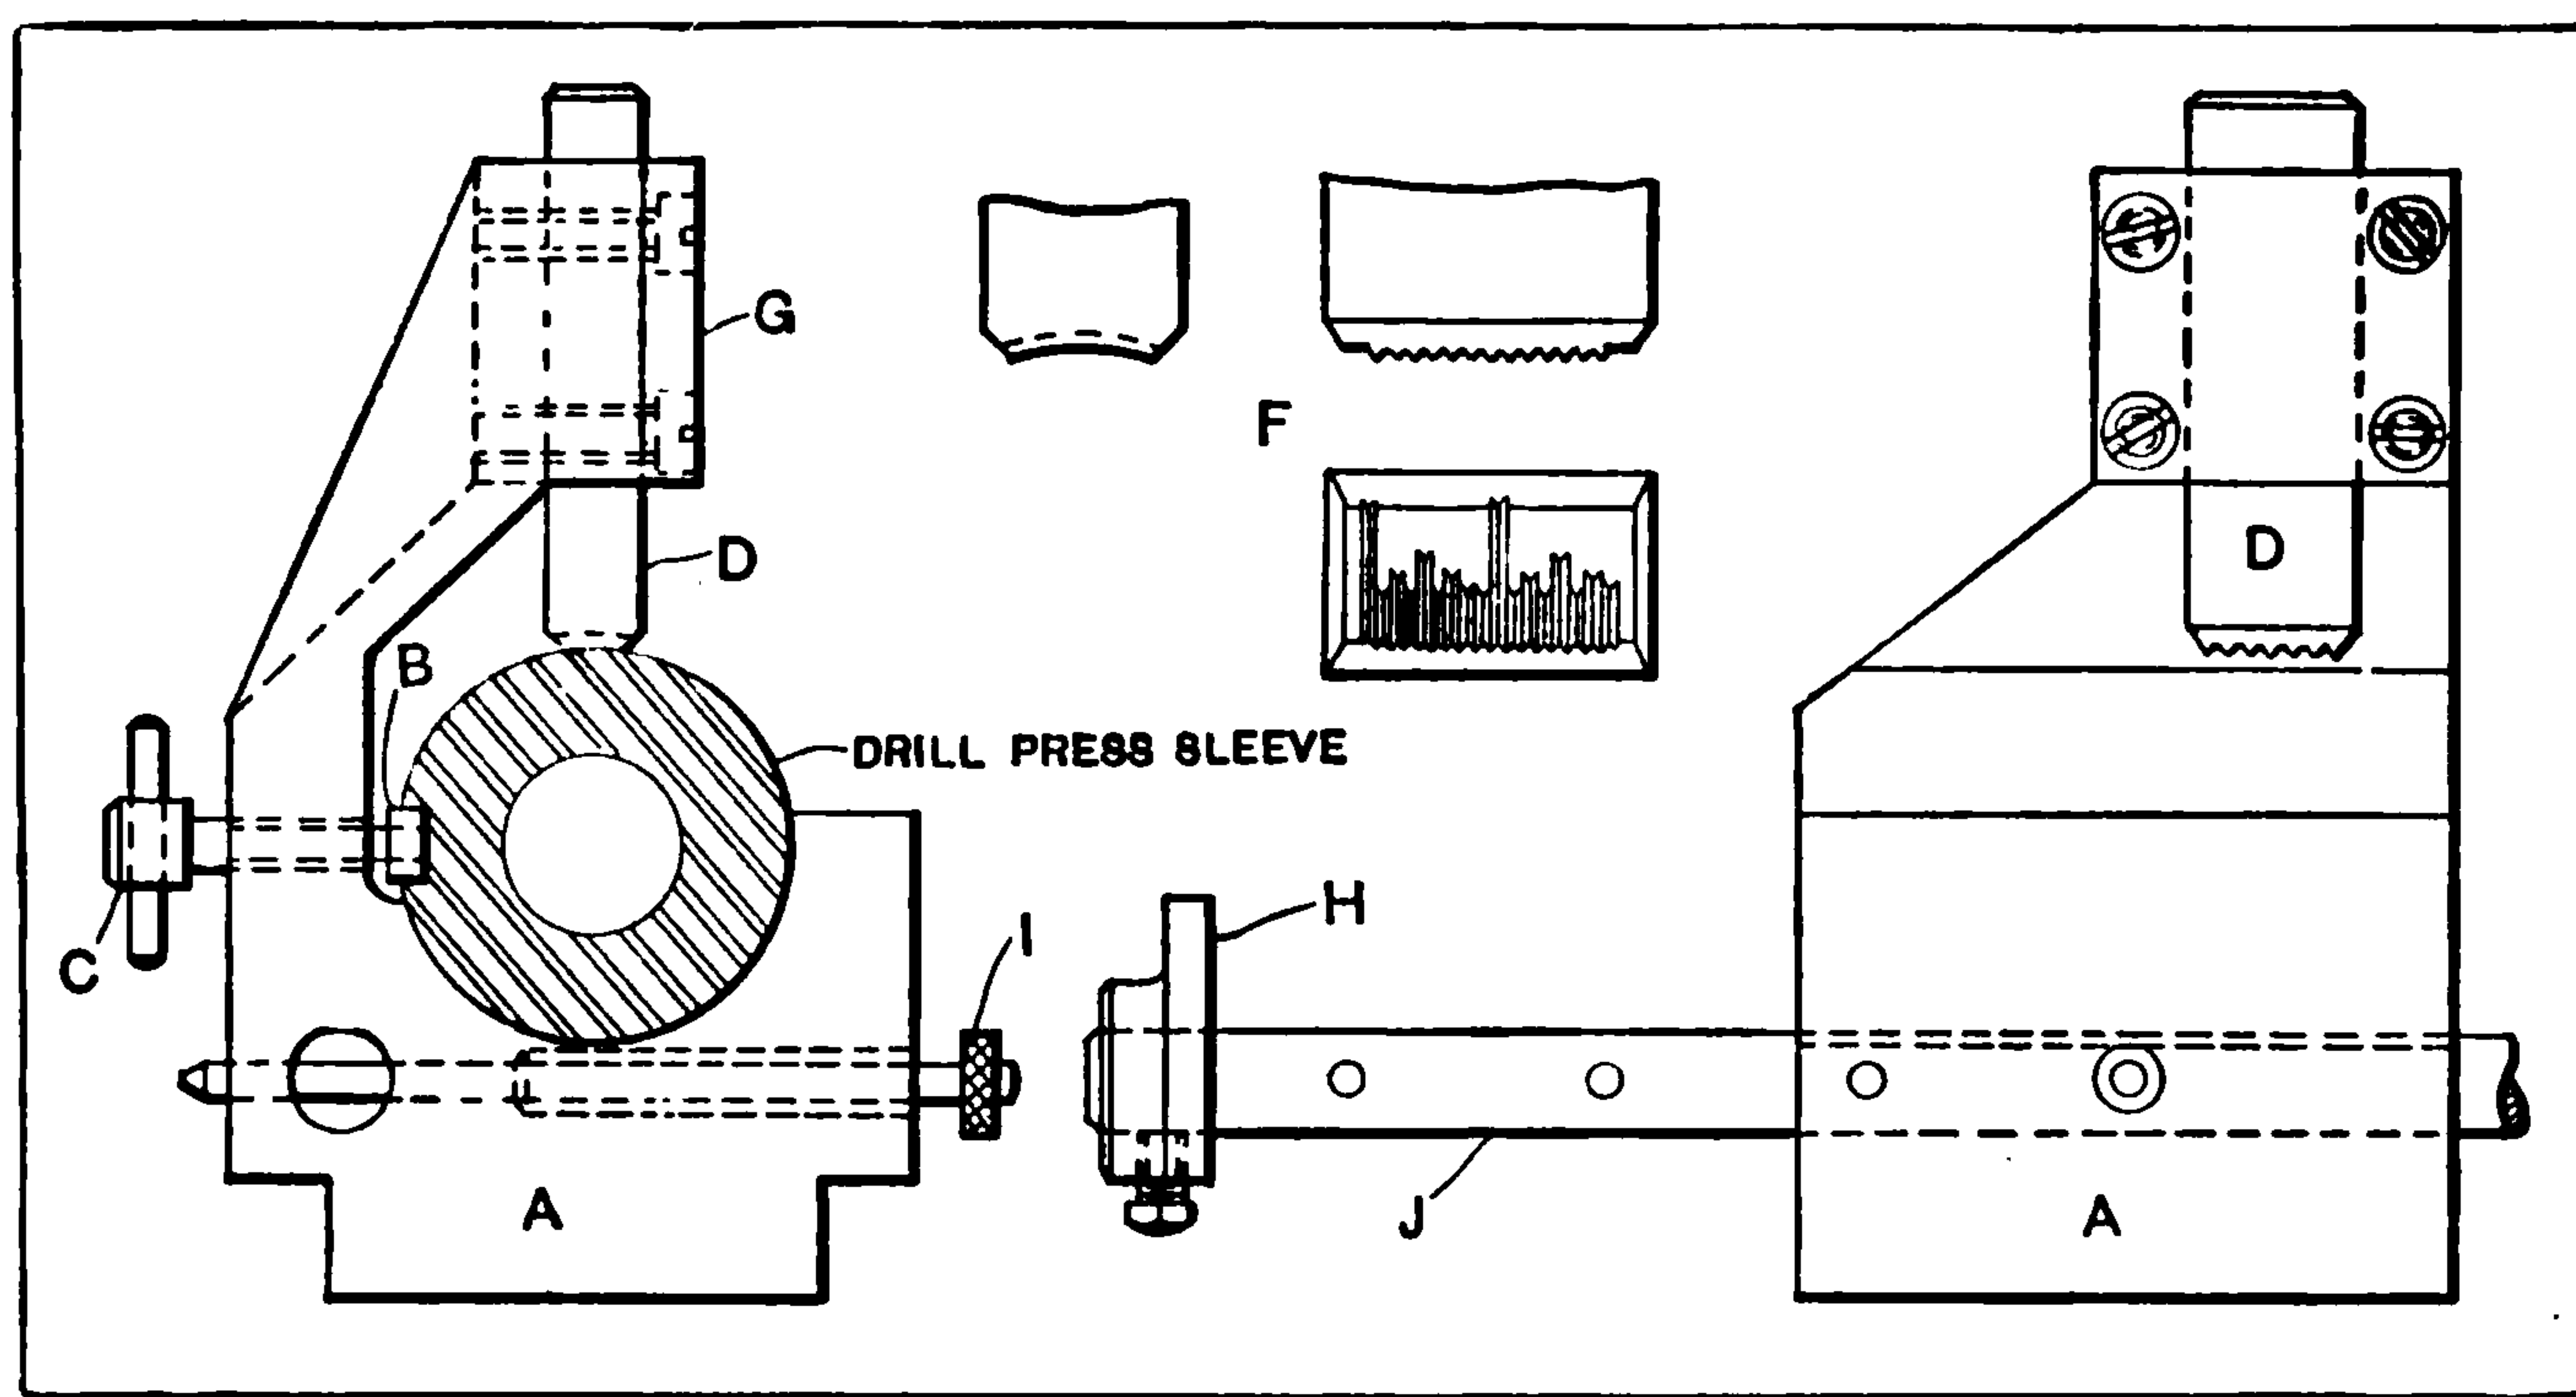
Fixture for graduating Drilling Machine Sleeves with a Stamp
